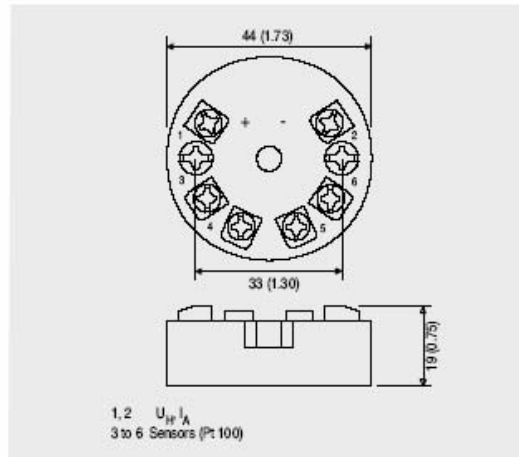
/21 Dimensions in mm (inches) and pin assignments
